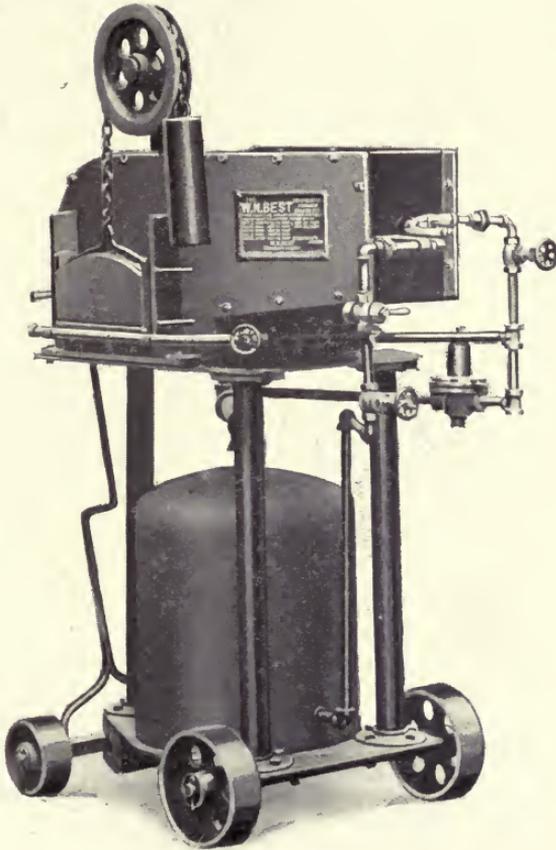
A Pipe Welding Furnace operated with one burner and used for welding a flange on 20 in. pipe, for van-stoning, etc.
